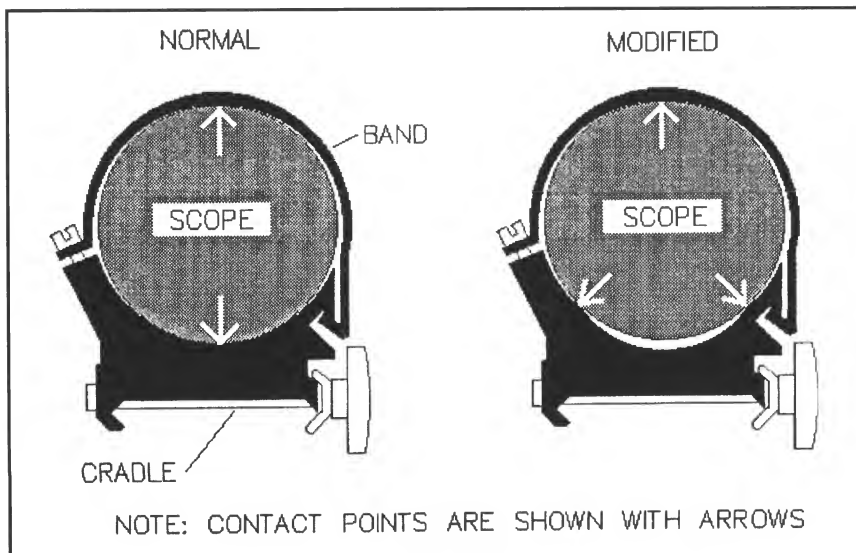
Sketch of a Weaver top mount demonstrating a modification to the cradle to eliminate the two-point contact with the scope tube.
